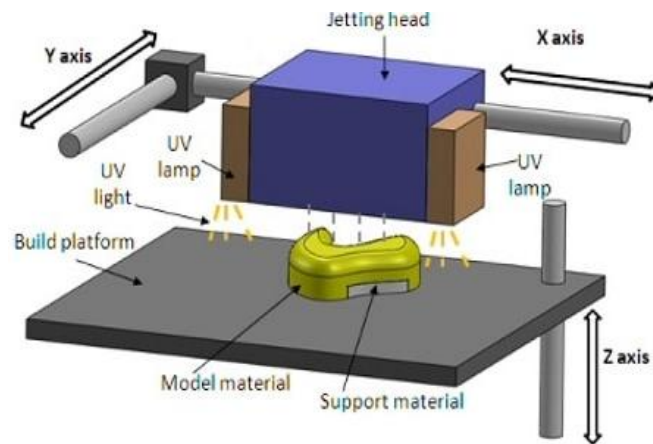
Schematic presentation of the PolyJet printing process [37]
